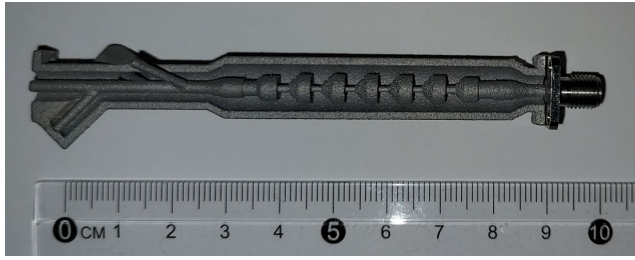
Photograph of a filter sample printed without half of the outer conductor cylinder, to enable visual inspection of the device inner surfaces, with an SMA coaxial connector attached to the filter output port.
